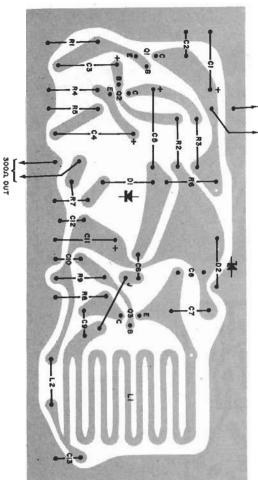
Actual-size etching guide for detector/modulator (bottom) features printed r-f oscillator coil. Componentplacement guide is at left.
